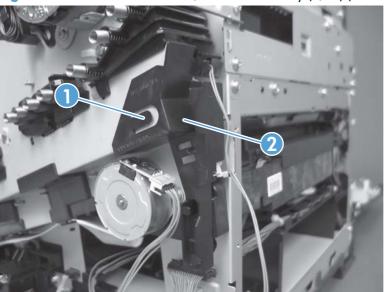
Remove the laser/scanner assembly (Y/M) (3 of 12)
